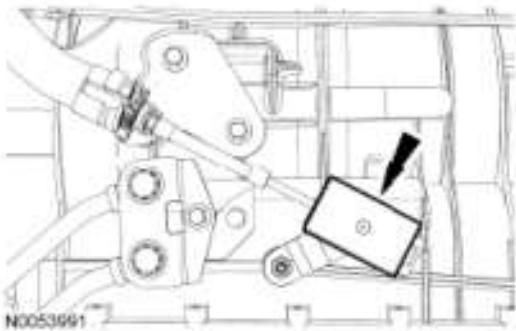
Locating Transmission Insulator And Retainer Nuts
